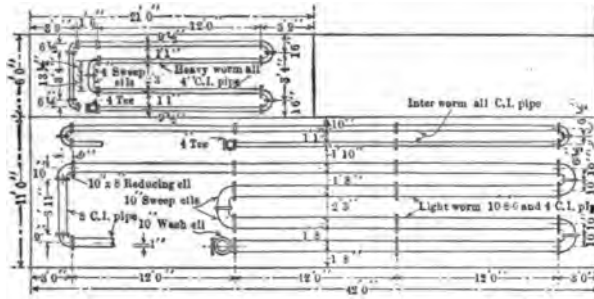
Top plan of a continuous cast-iron worm for a 1000-barrel tower shell.
